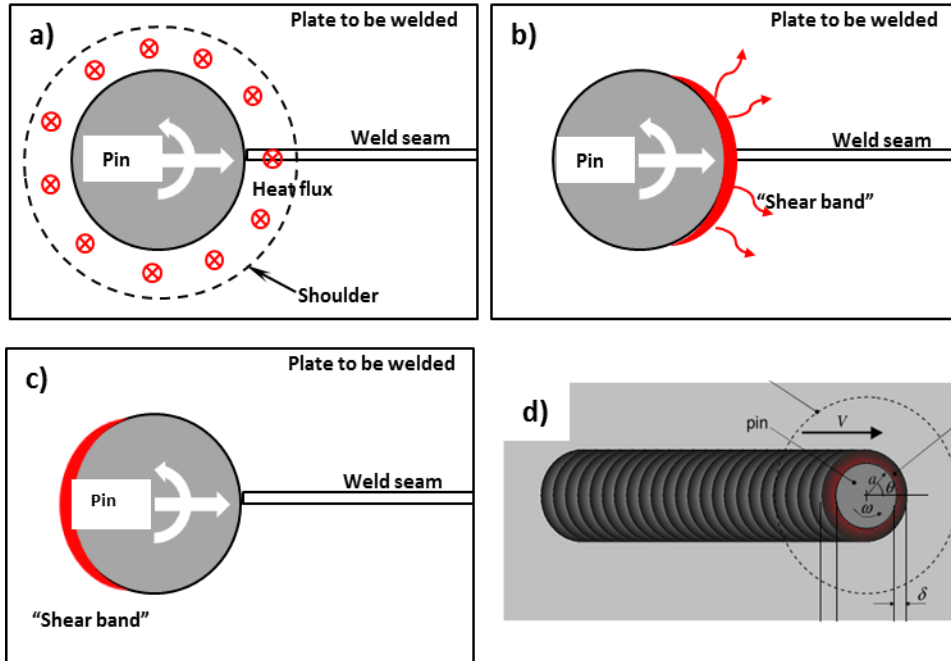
Four stages to form a FSW joint: (a) Shoulder/workpiece interface heating and 3D heat conduction; (b) Pin/workpiece interface sliding and sticking – shear localization; (c) In-plane (2D) Shear flow and band rotation; (d) Formation of banded structure through consecutive shear bands of δ in width
